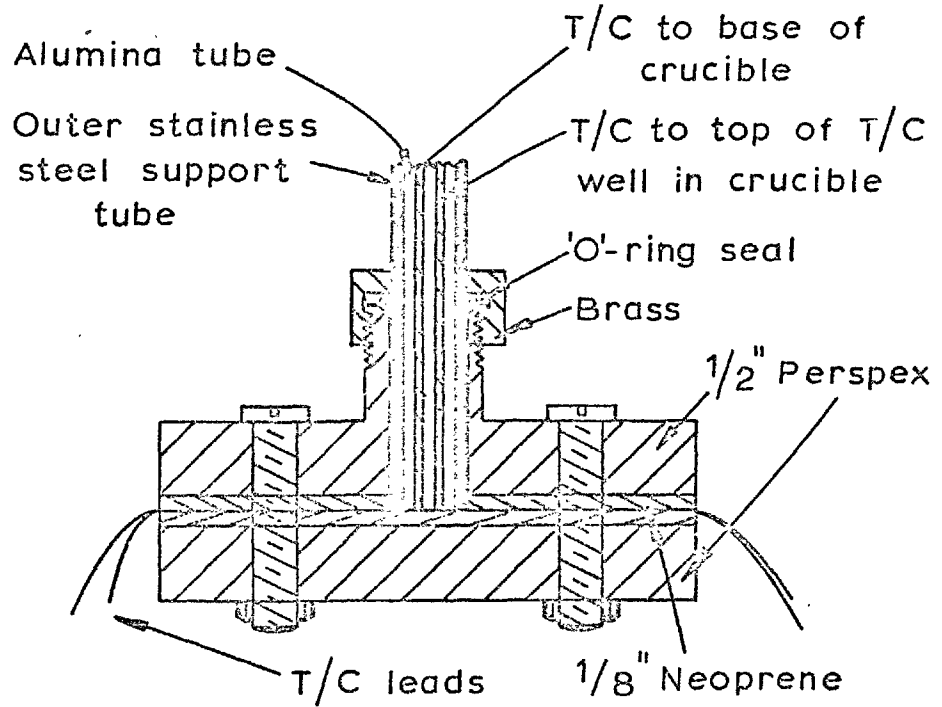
D- GAS TIGHT THERMOCOUPLE ENTRY ASSEMBLY
